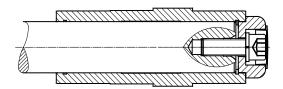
Gear unit mounted to shaft without a shoulder using the fastening element
